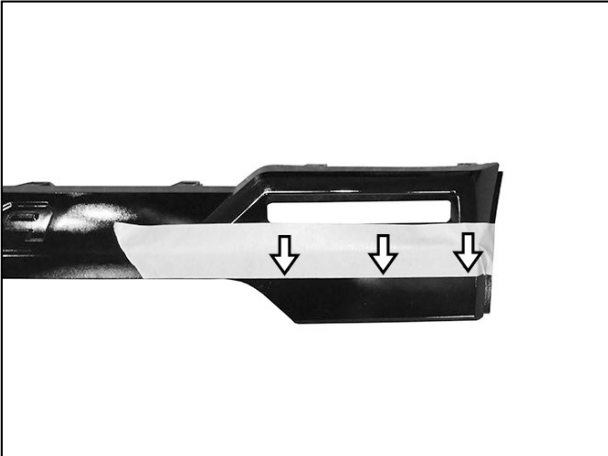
Remove outer bumper covers and center bumper support from bottom of grille
